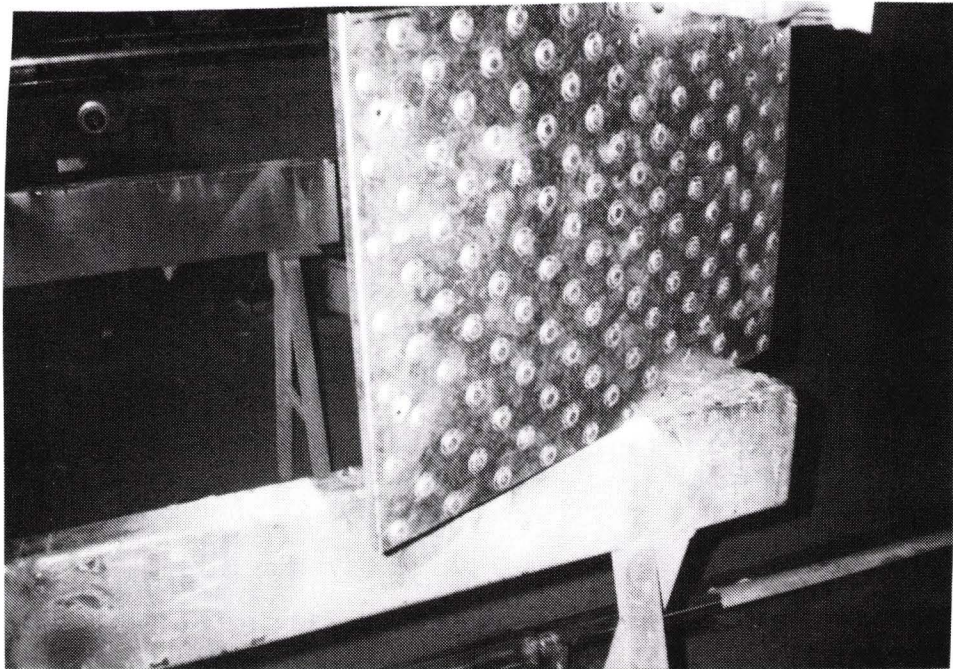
STAMPED SHEET METAL WITH EDGE BENT OVER
